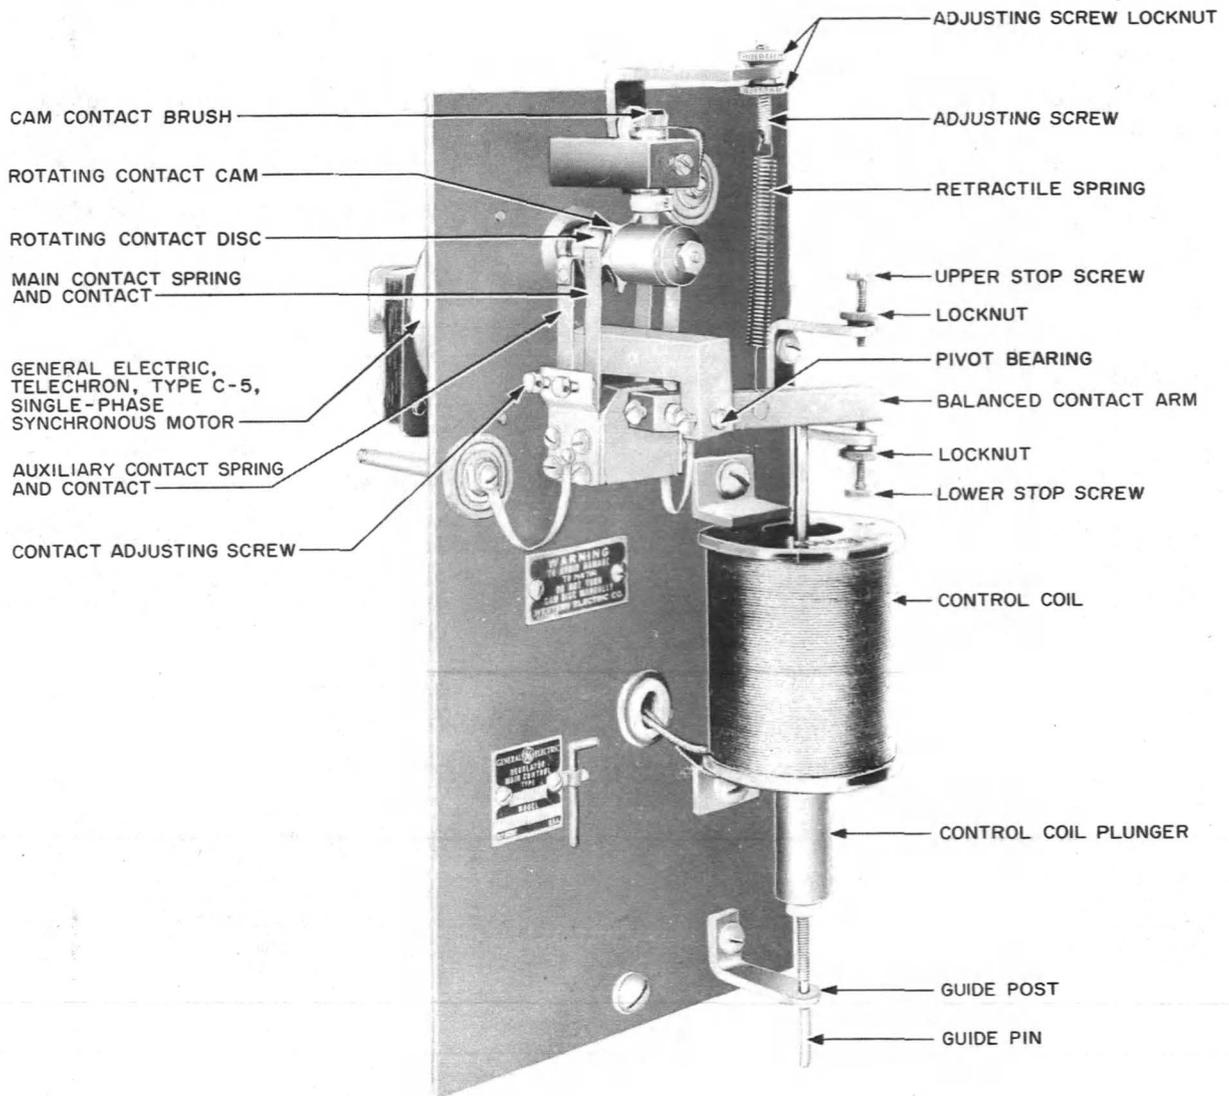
KS-5519 Voltage Controller (later type shown)
